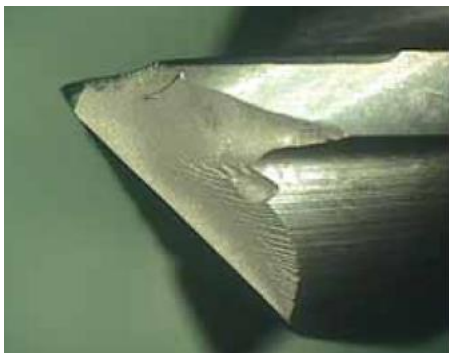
The first cutting experiment of single gradient AlCrN coating tool edge fracture morphology.
